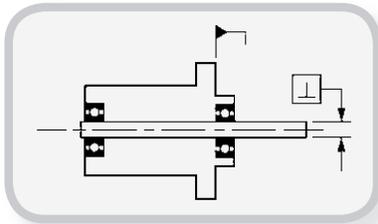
Perpendicularity of shaft axis to mounting datum
